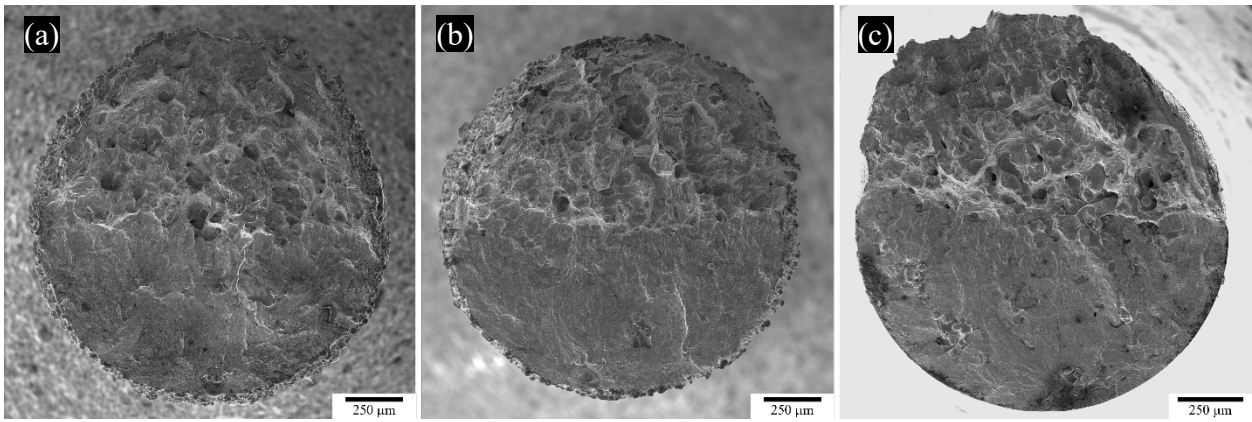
Representative fatigue fracture surface for 1.5 mm ProX 200 specimens in the (a) as-built, (b) stress-relieved, and (c) surface-removed conditions.
